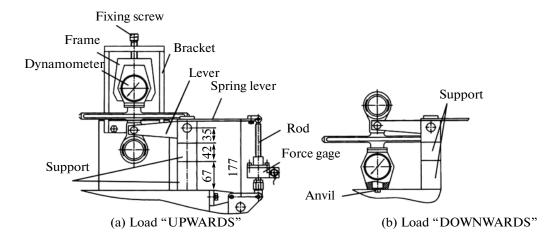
Schematic of calibration of bending load control system of SI-03M test machine.
